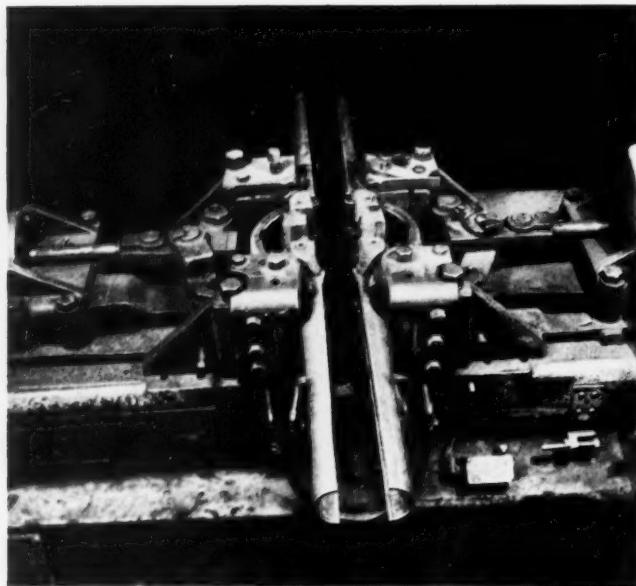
A Flash Welder which Tack-welds the Two Halves of the Banjo Housing together
